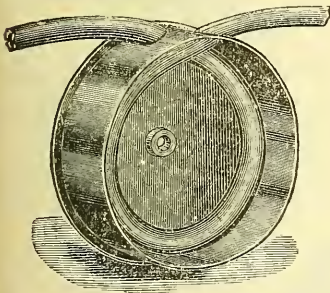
Showing the Rubber Tube coiled within the Cylinder.
